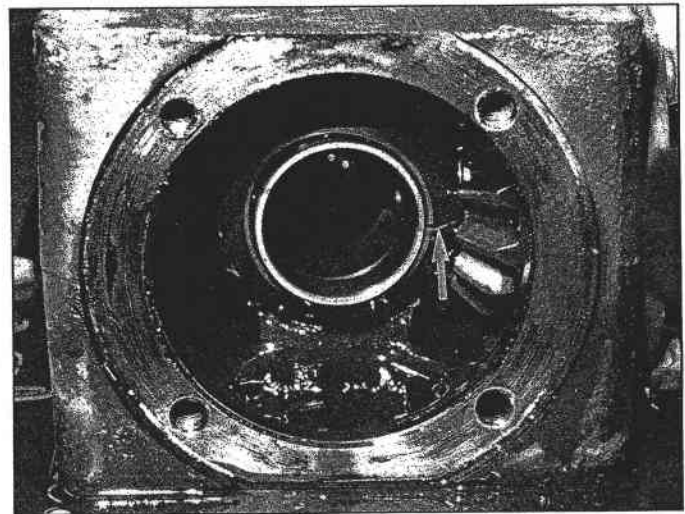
Exemplar gear box - arrow indicates fractured input inboard bearing support after shear loading
